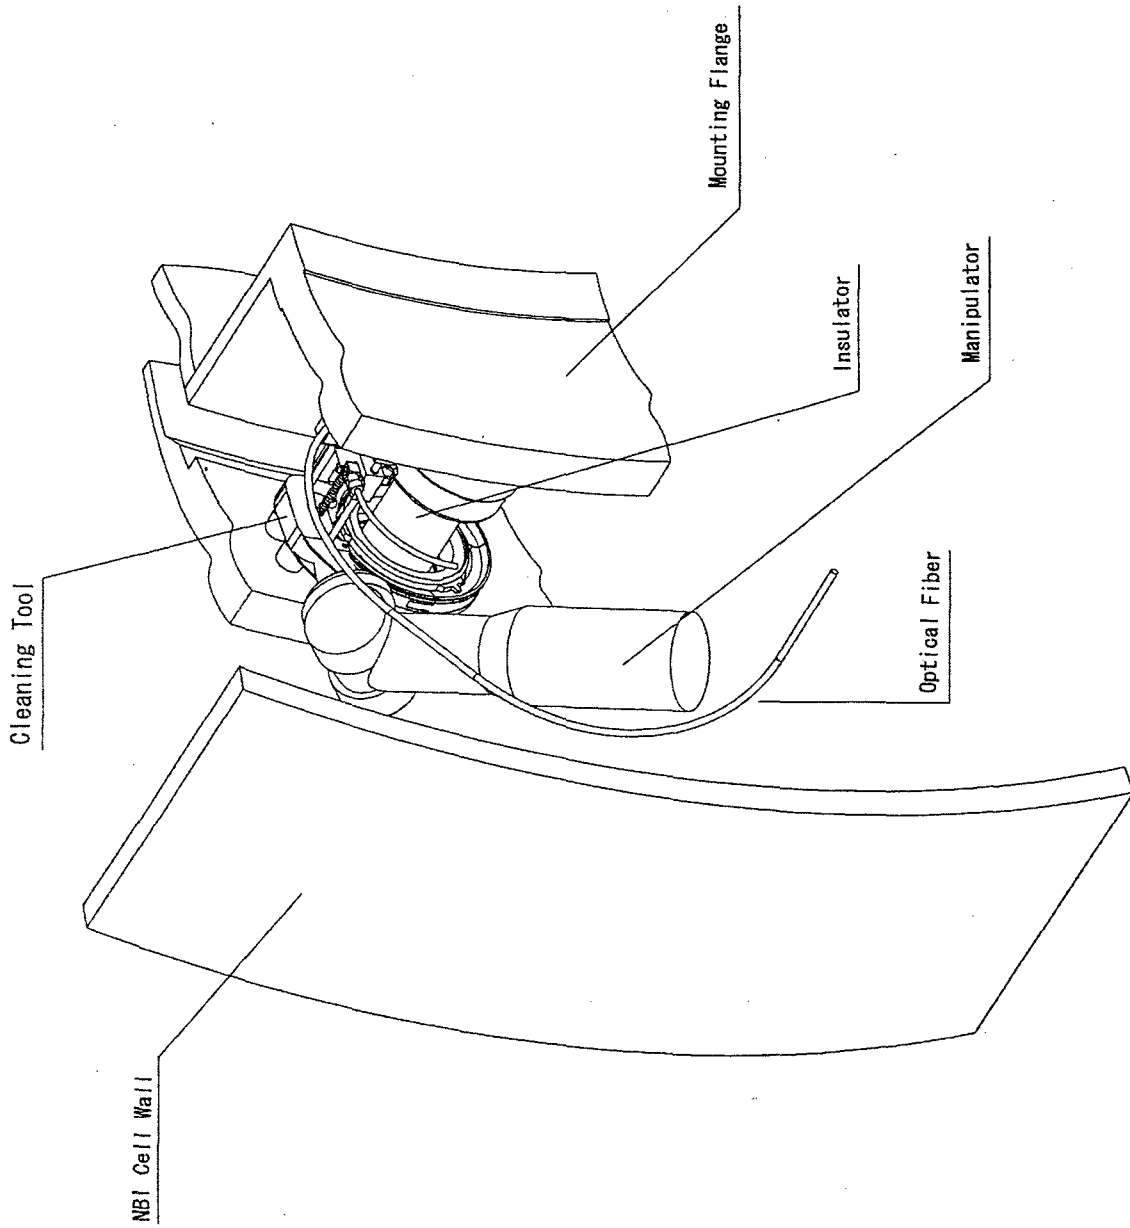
Cesium Cleaning Tool Installed on Insulator
